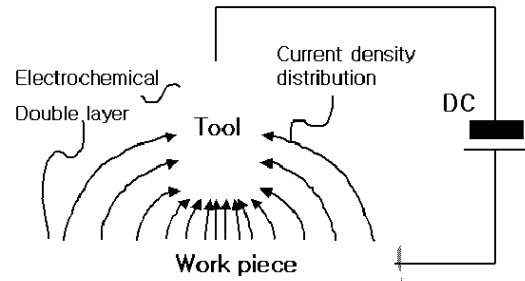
The geometric arrangement of tool and workpiece for fixed electrode².
